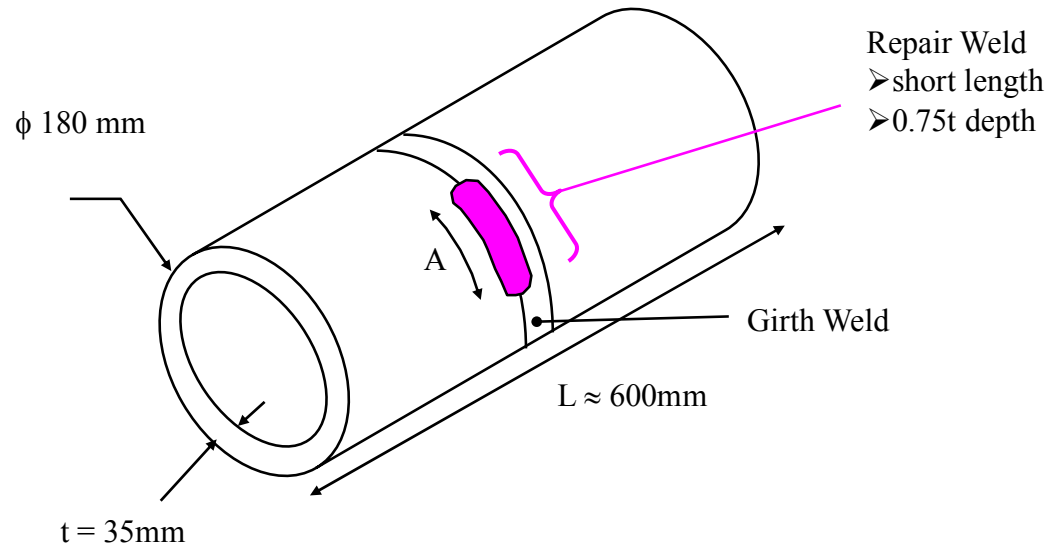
Schematic layout of long pipe mock-up containing a weld repair. The surface length of the repair was approximately 100mm, subtending approximately 60°.
